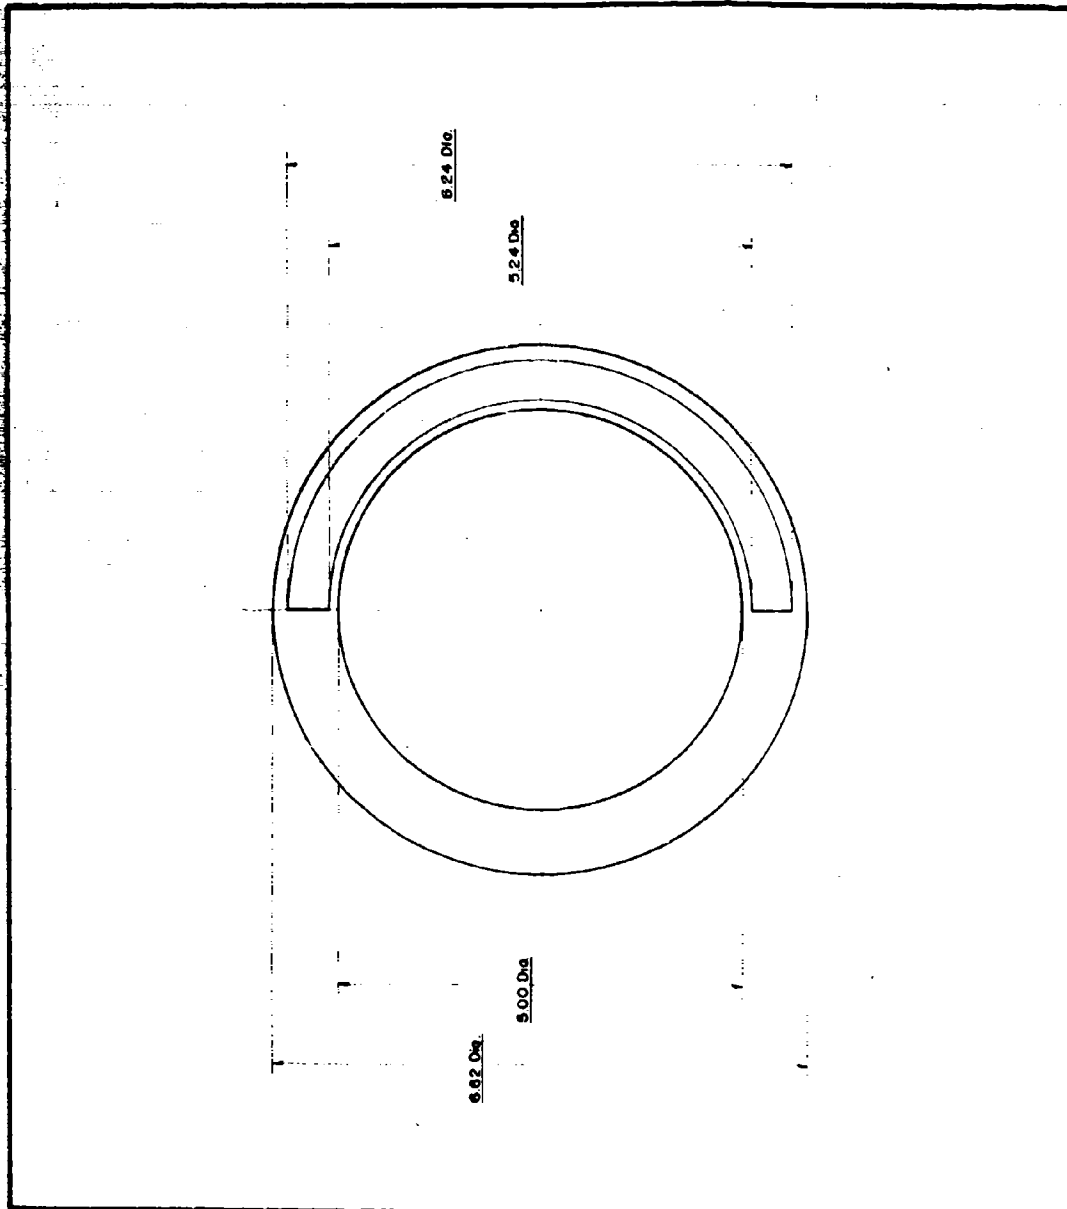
Typical Location of Stress Corrosion Ring Test in Forging Barrel
